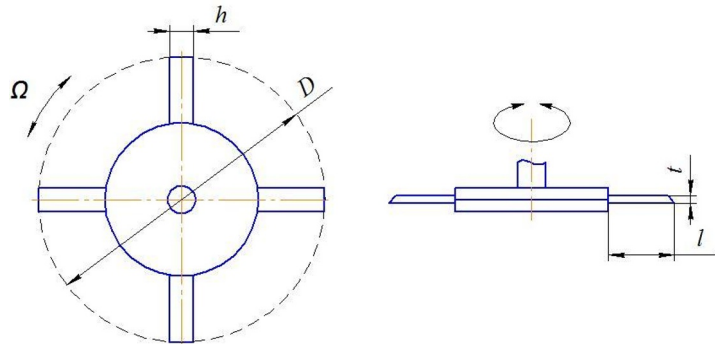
Rotor of a forest machine with a flat-turning working body.
